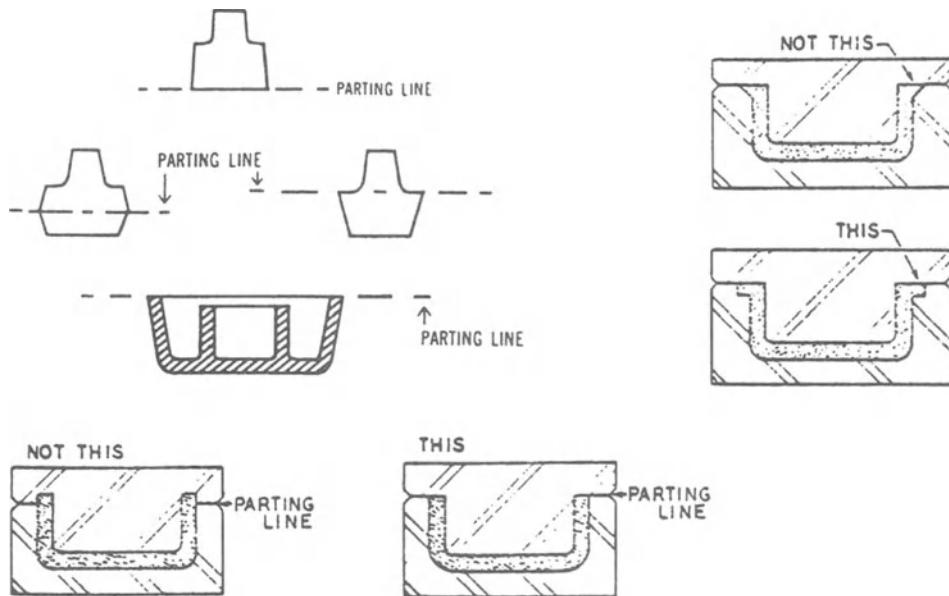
Examples of parting line locations. The extreme right diagram shows that having sharp corners could cause poor dimensional control or possibly nonflat surfaces with inadequate mold cooling.
